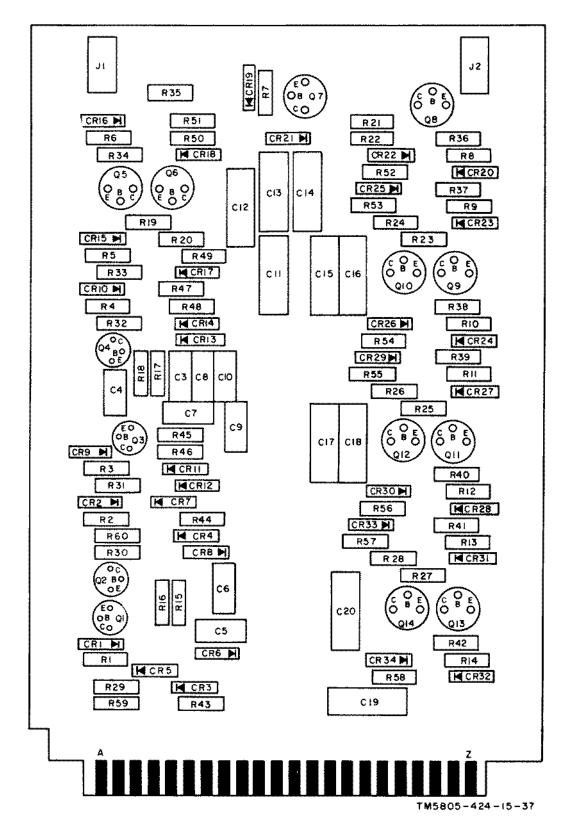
Printed-circuit card assembly A4 (PC 80034080), component location diagram.
